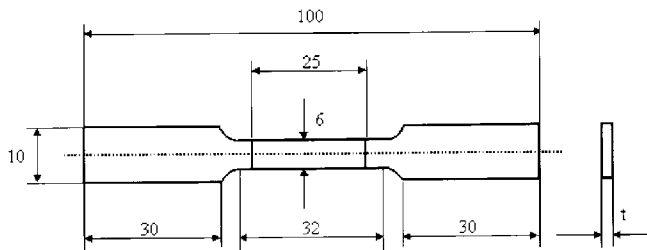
Schema of the tensile test samples (dimensions in millimetres).
